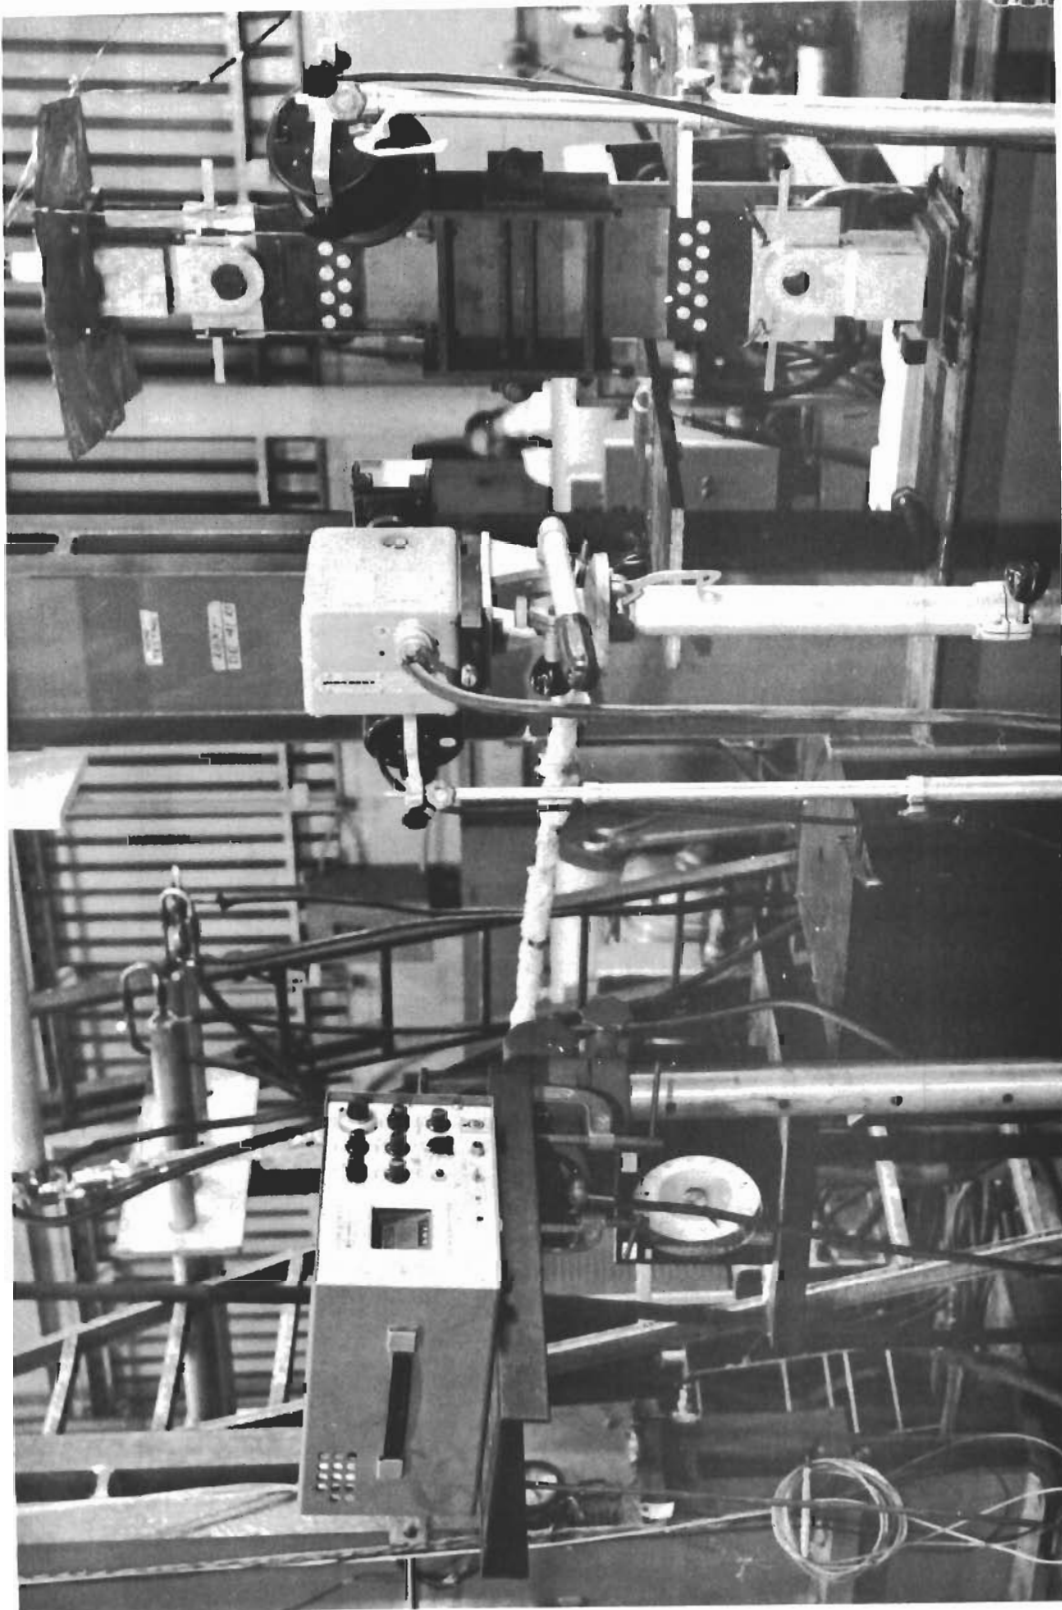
TEST SETUP FOR HIGH-SPEED PHOTOGRAPHY EQUIPMENT
